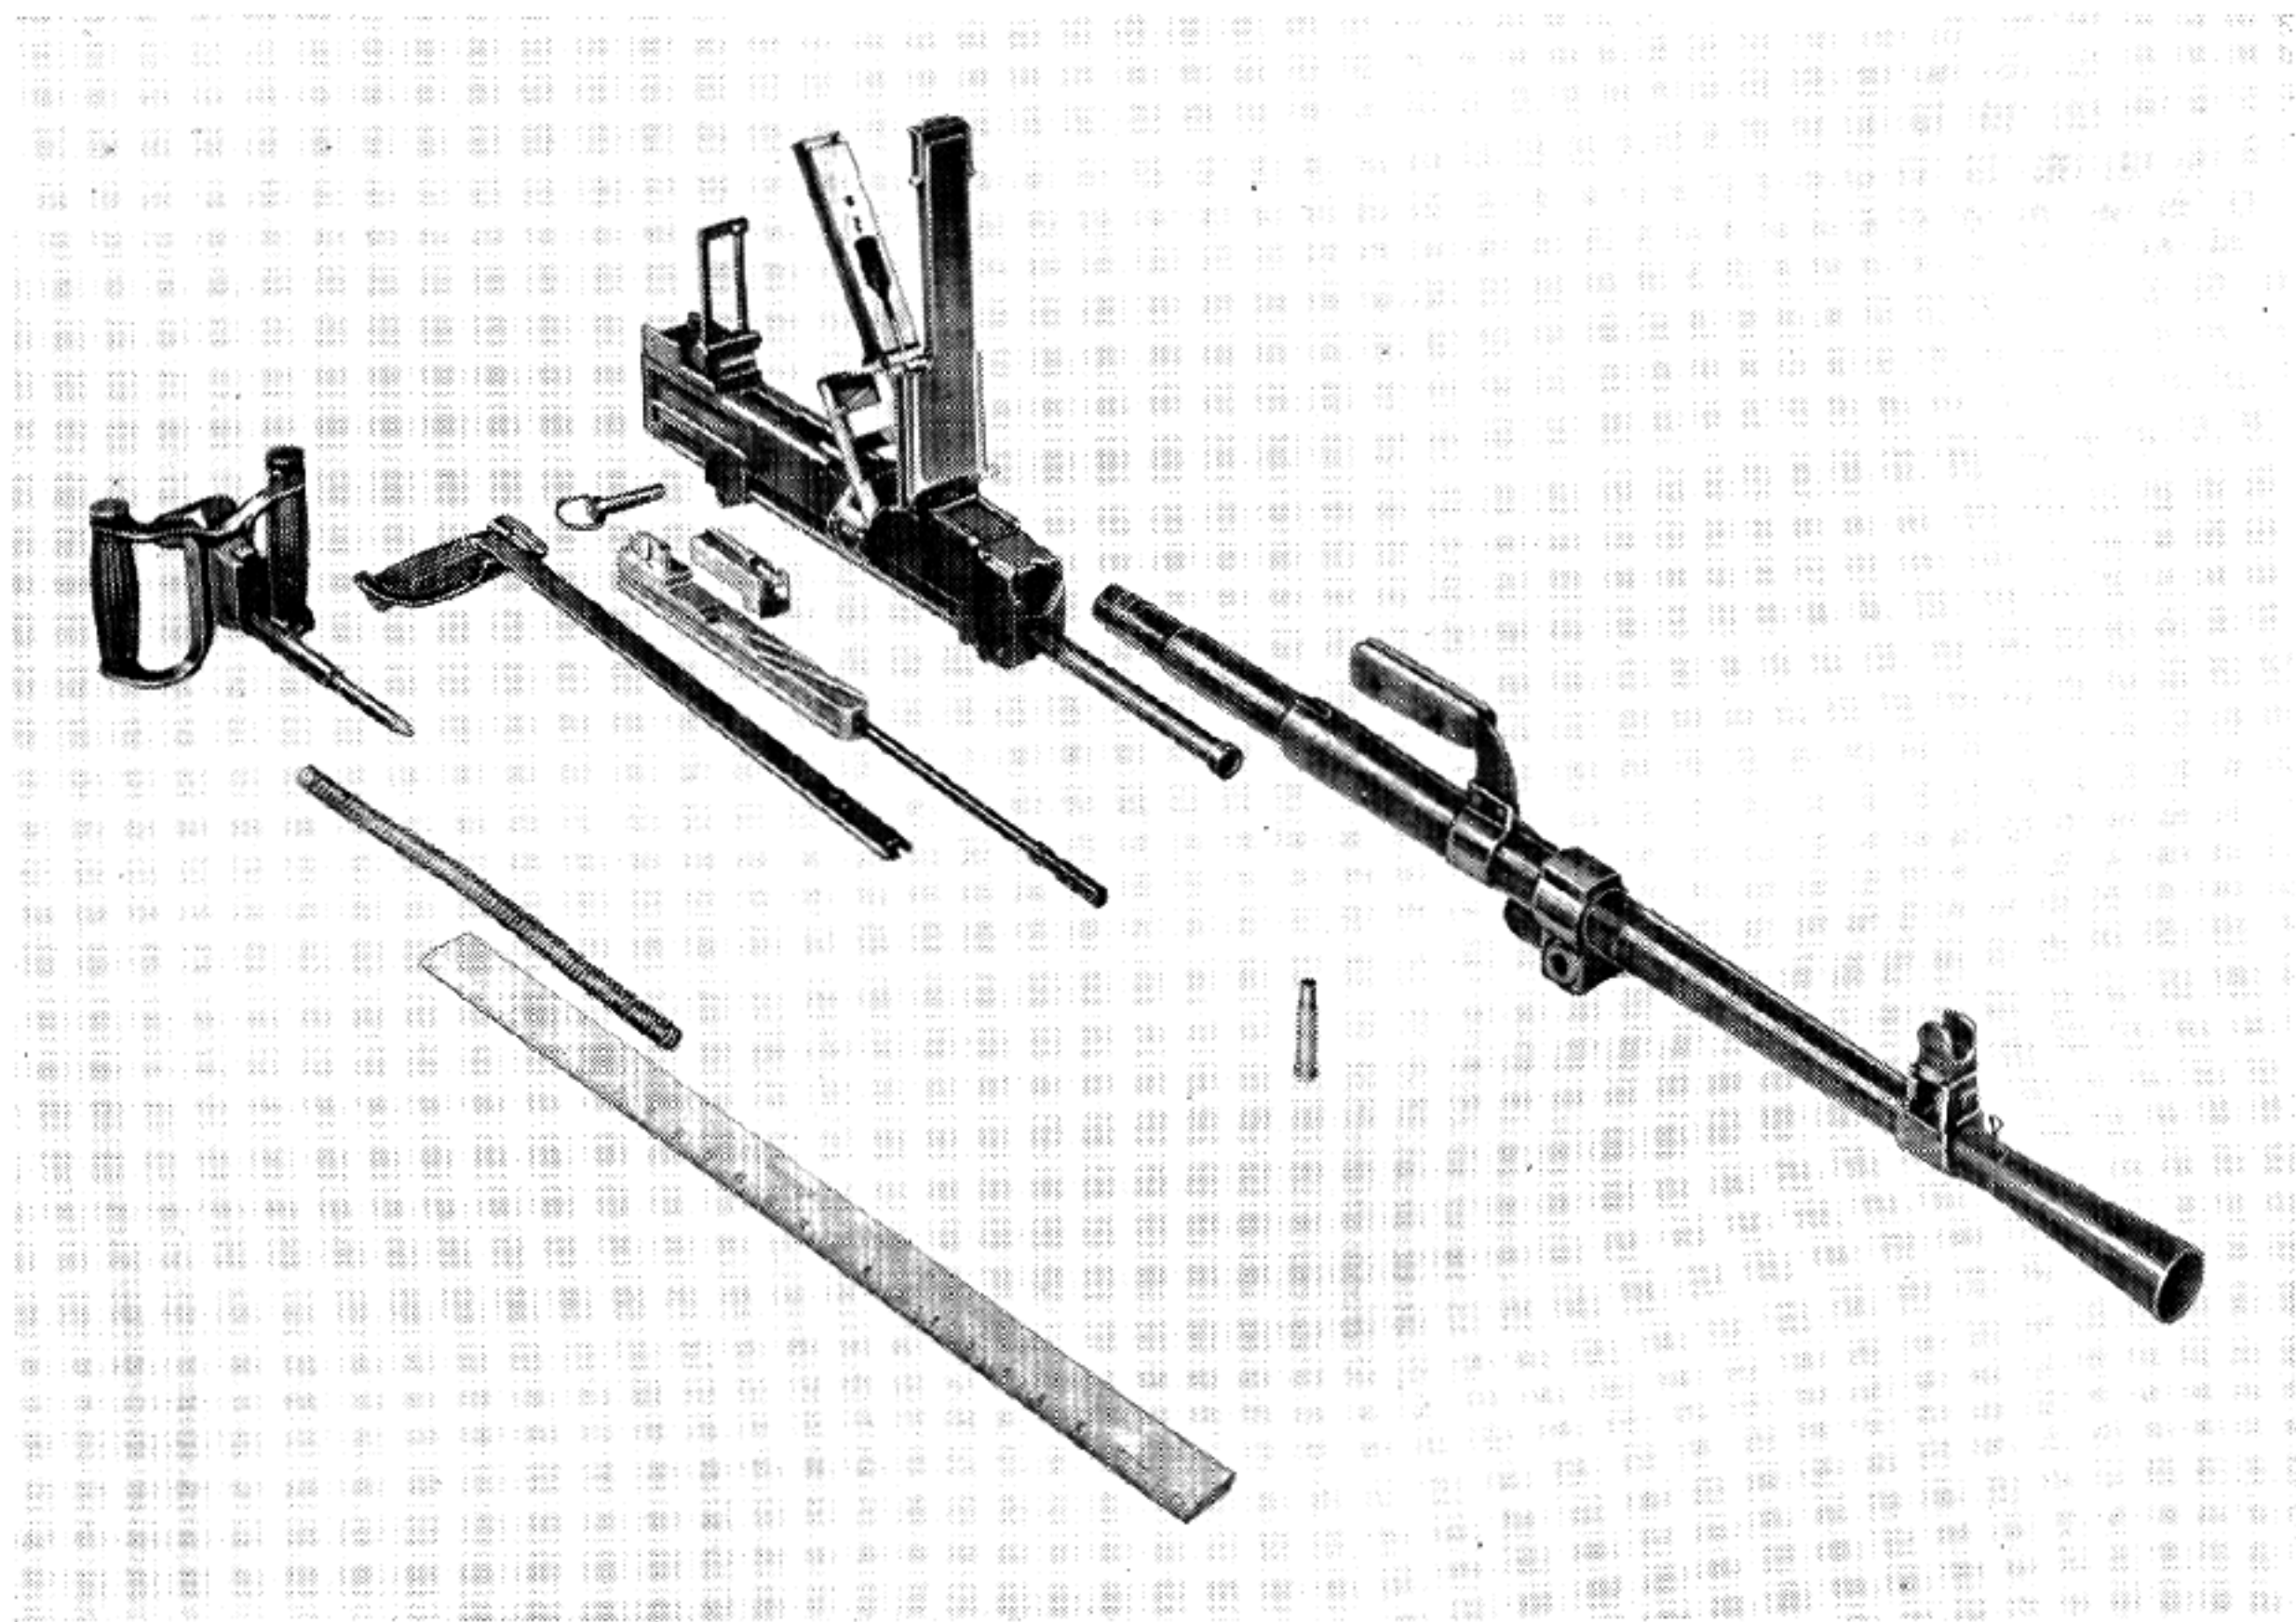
Stripping the SG-43, continued. The retracting handle has been removed. The bolt has been separated from the operating slide.
